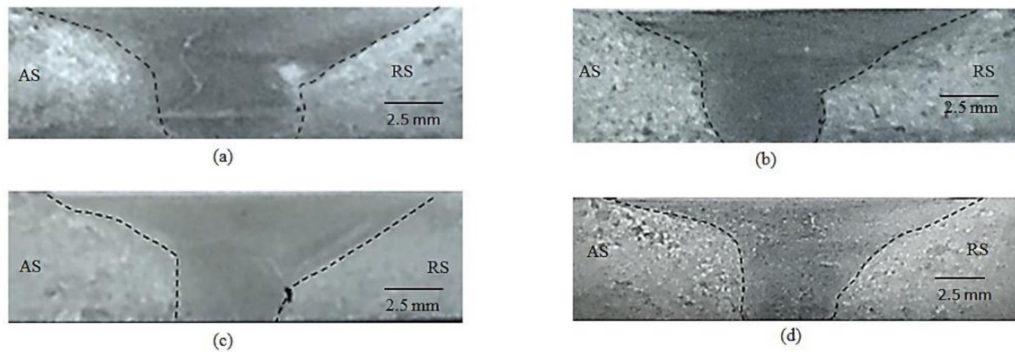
Experimental weld zone: (a) T1: Cylindrical pin tool; (b) T2: Conical pin tool; (c) T3: Cylindrical-Conical pin tool and; (d) T4: Stepped-Conical pin tool
